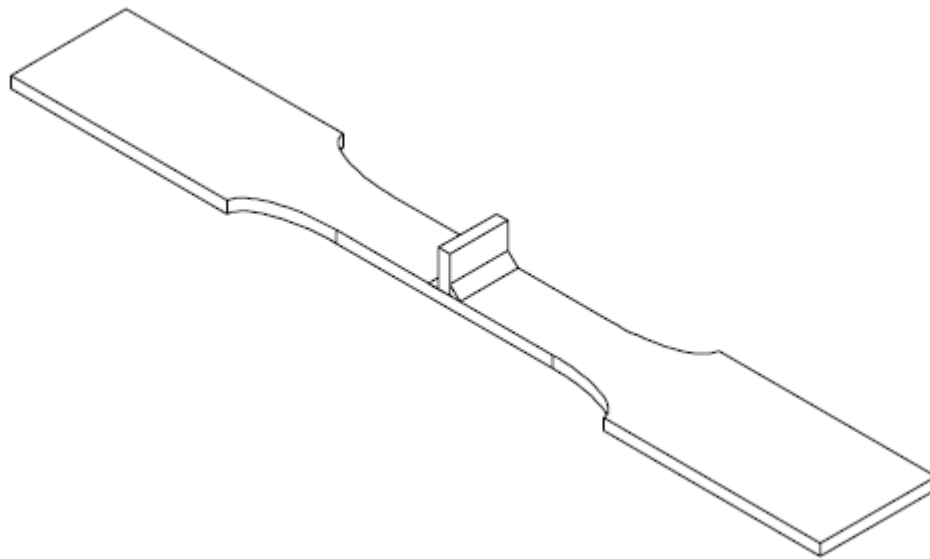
Isotropic view of the T-joint fillet weld
